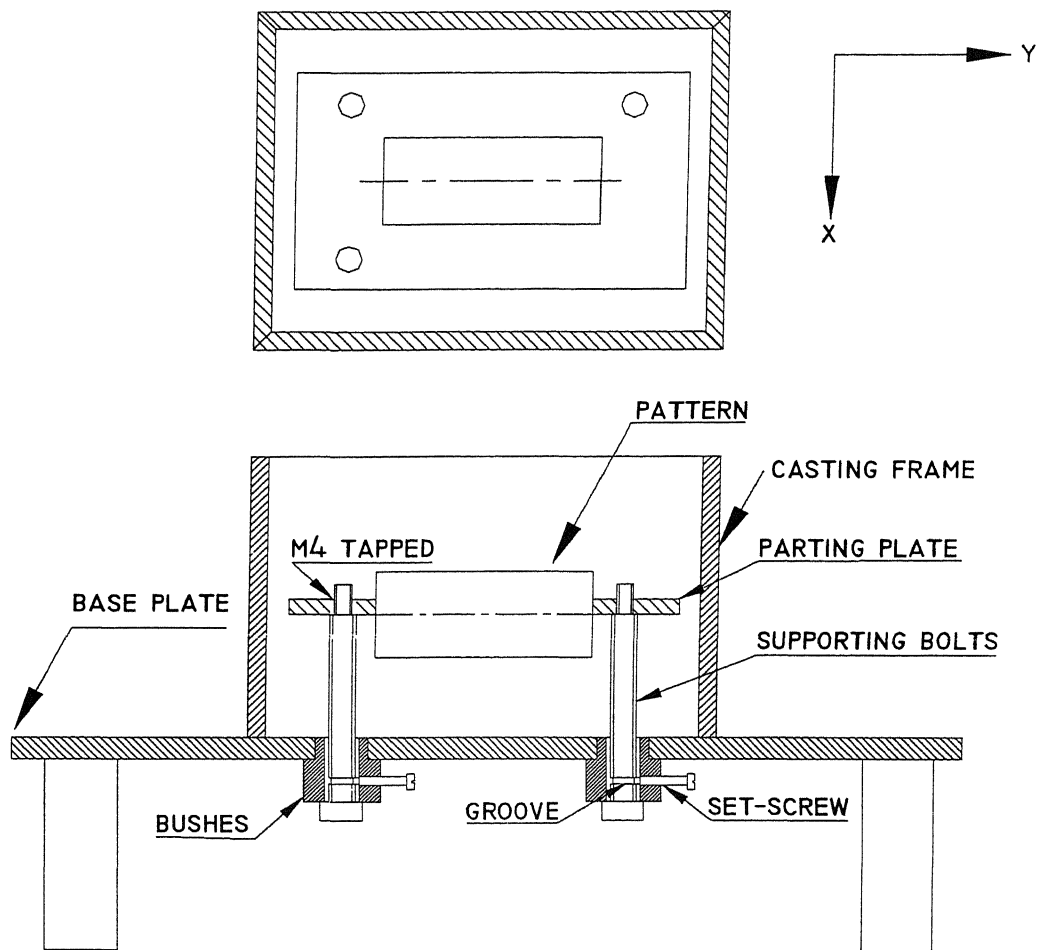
Pattern inserted in PL plate and supported on bolts
